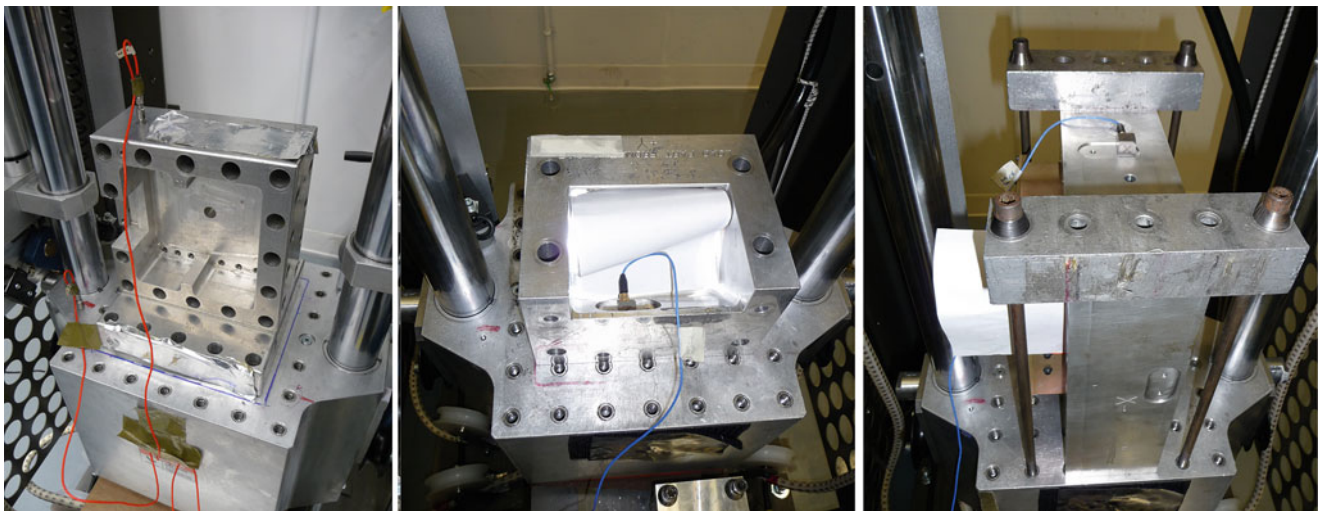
Fixture B with adapter plate, fixture D(Y), fixture E with straps
